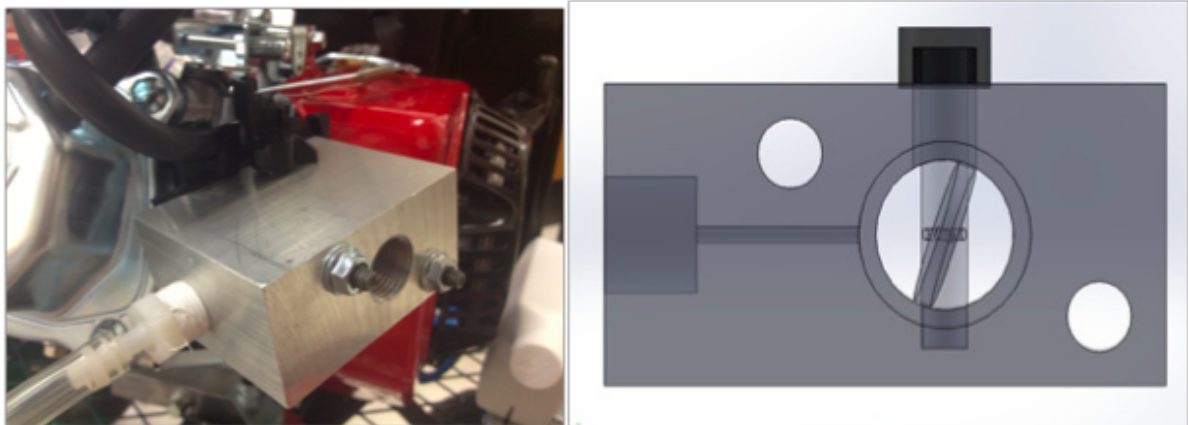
Fuel-to-carburetor connection and carburetor SolidWorks model
